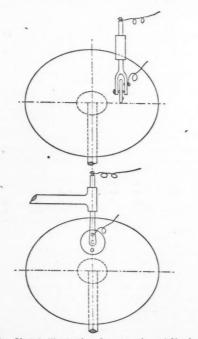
Sketch Illustrating Construction of Mechanical Integrator for C., B. & Q. R. R. Dynamometer Car
